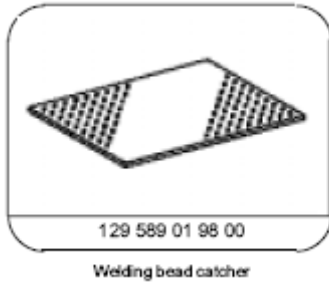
Identifying Welding Bead Catcher (129 589 01 98 00)
